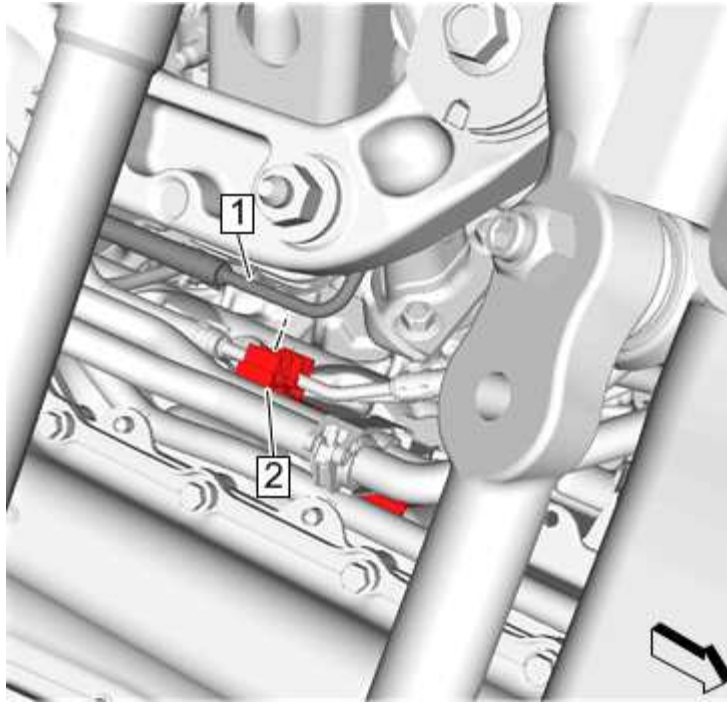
Emission Reduction Fluid Injector Outlet Hose
